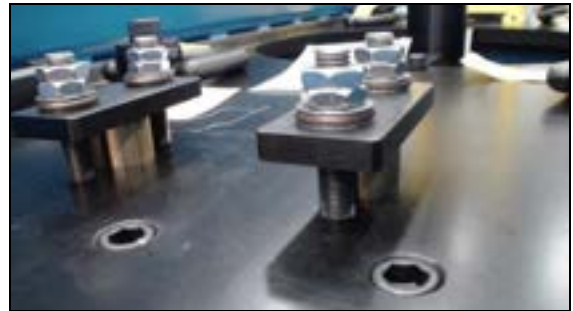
SIDE VIEW OF DRAG BRAKE
